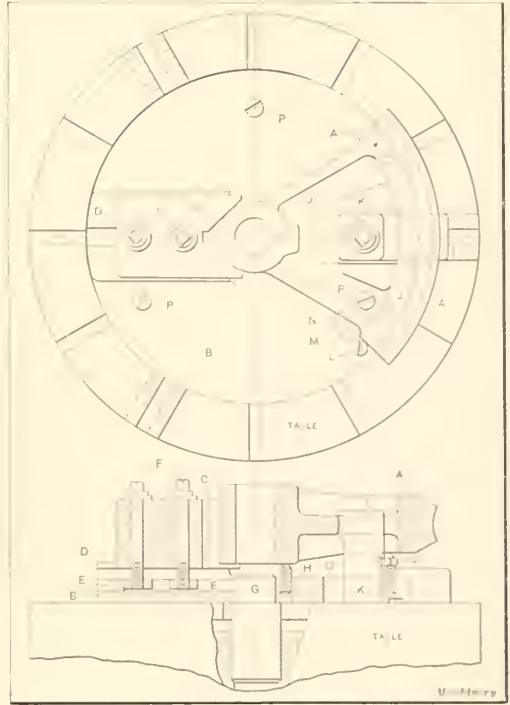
Adjustable Fixture for holding Three Sizes of Bronze Worm-gear Sectors
